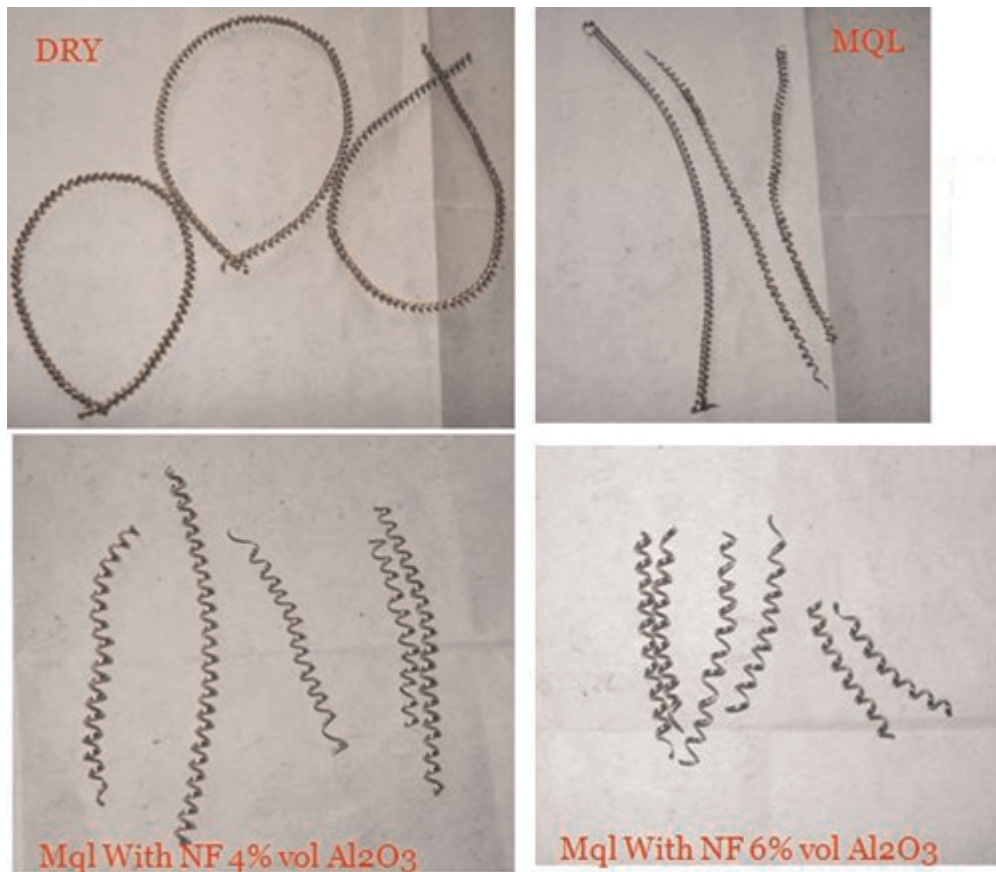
Chips obtained in machining Inconel 600 at different environments at speed = 40 m/min, feed = 0.16 mm/rev, DOC = 1.2
